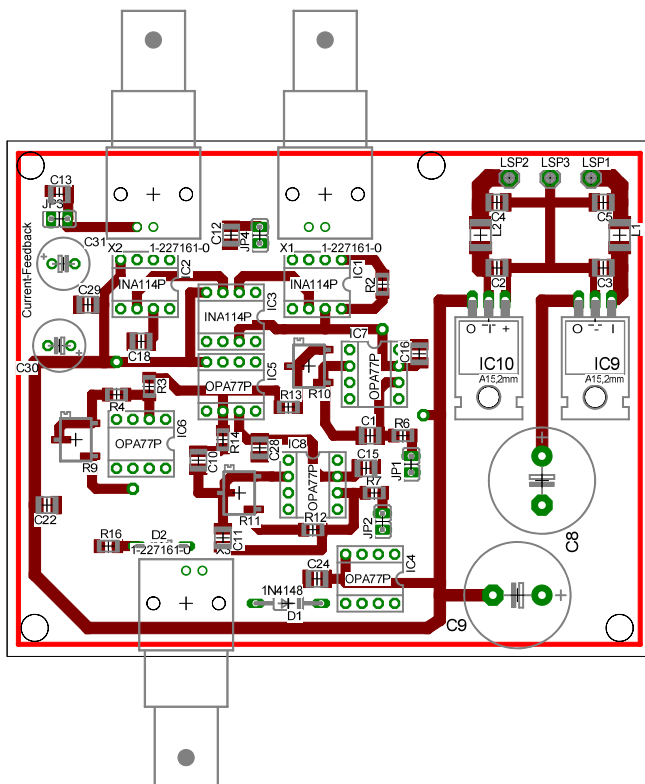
Top layer of the printed circuit board for the feedback circuit.
